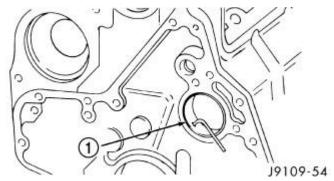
Camshaft Bushing Courtesy of CHRYSLER GROUP, LLC
